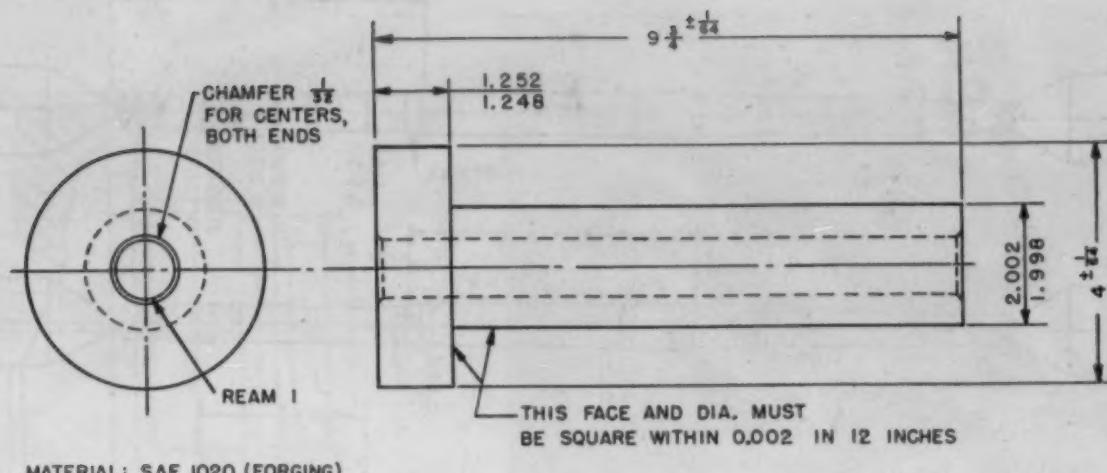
Sketch of a spindle that can be finished in an engine lathe or a plain grinder.
